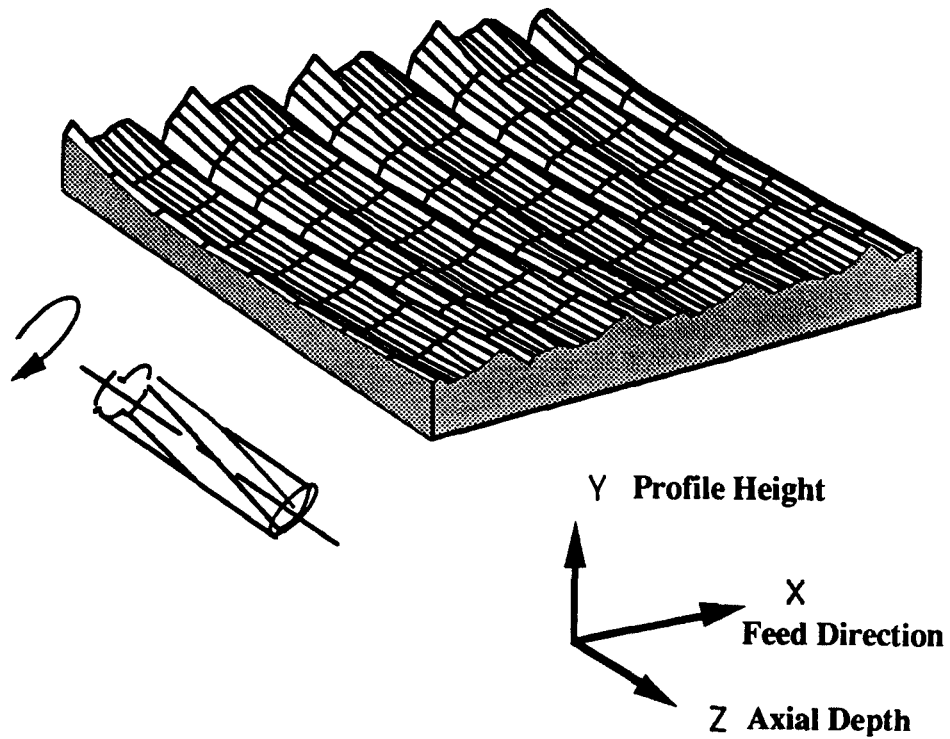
The 3-D geometry of end milled surface for vibration case in one cutter revolution
